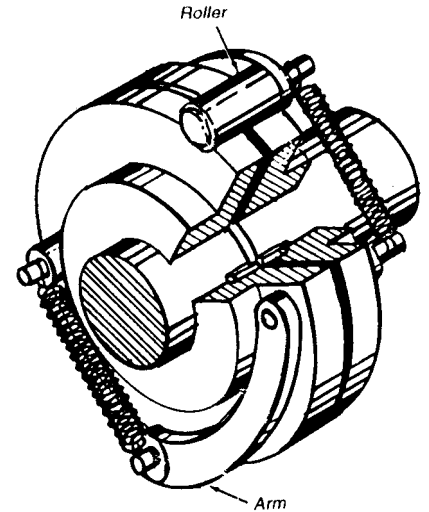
Arms hold rollers in the slots that are cut across the disks mounted on the ends of butting shafts. Springs keep the roller in the slots, but excessive torque forces them out.
